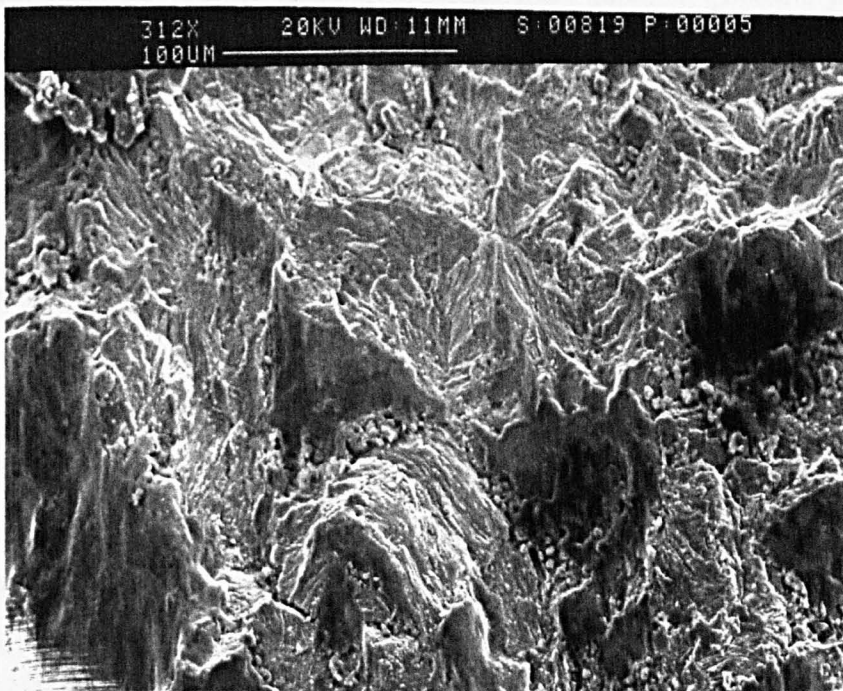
Magnified View of Surface Rubbing Damage.
